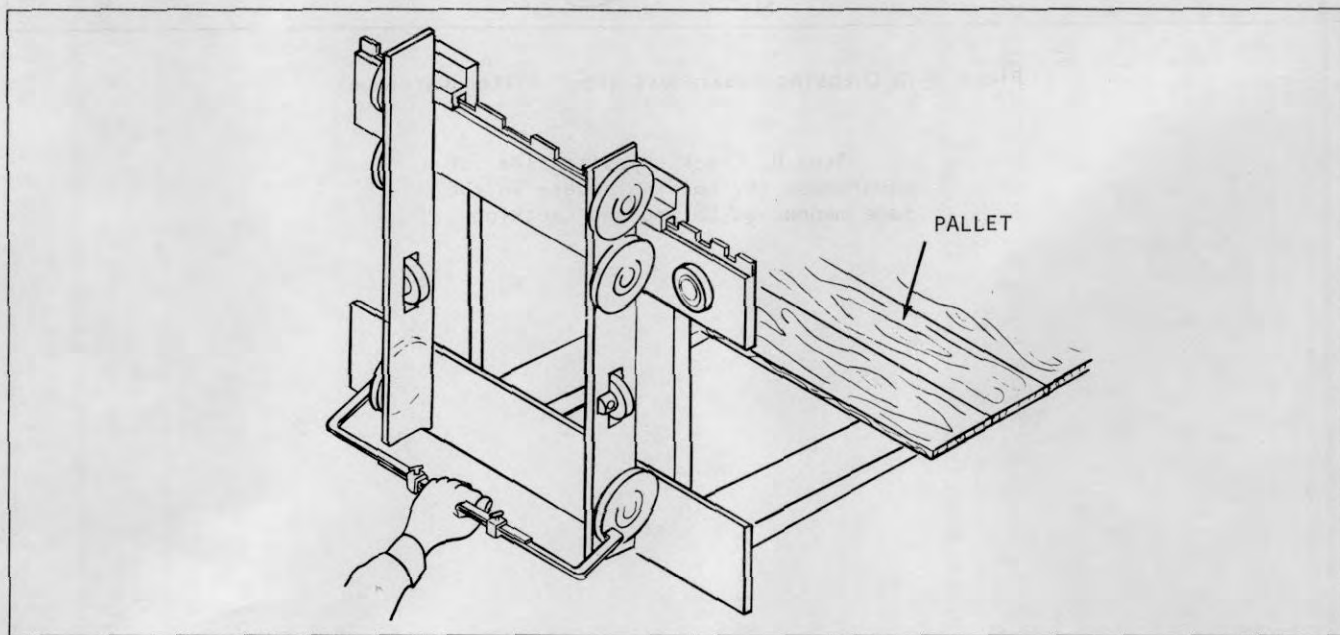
Spanning Lower Rollers (Six Roller Carriage)
